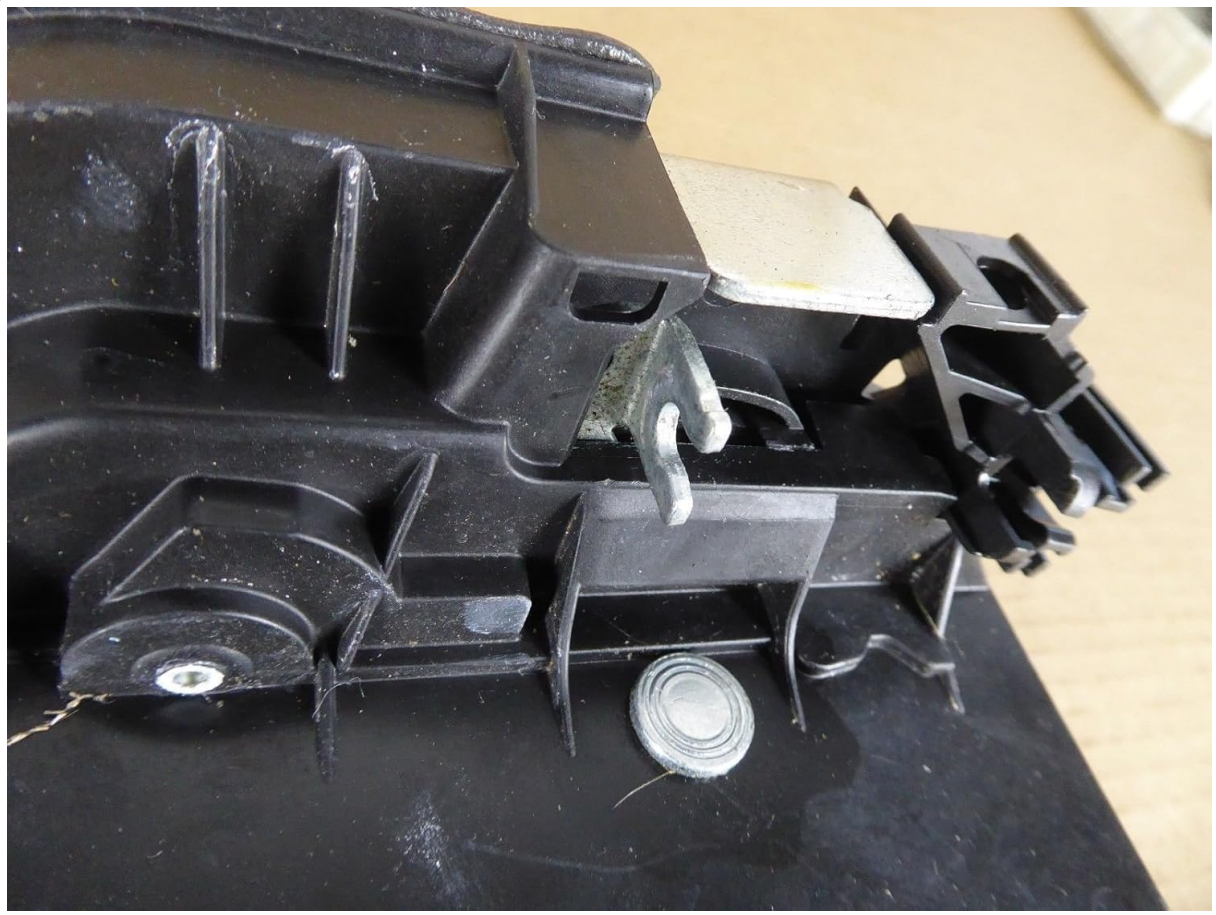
Close-up view of the latch mechanism. This image highlights the metal components responsible for securing the door, showing the robust construction of the locking system.
